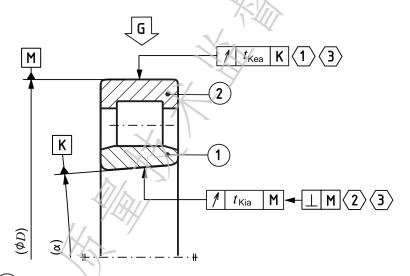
Geometrical tolerances for single components for bearing with tapered bore
